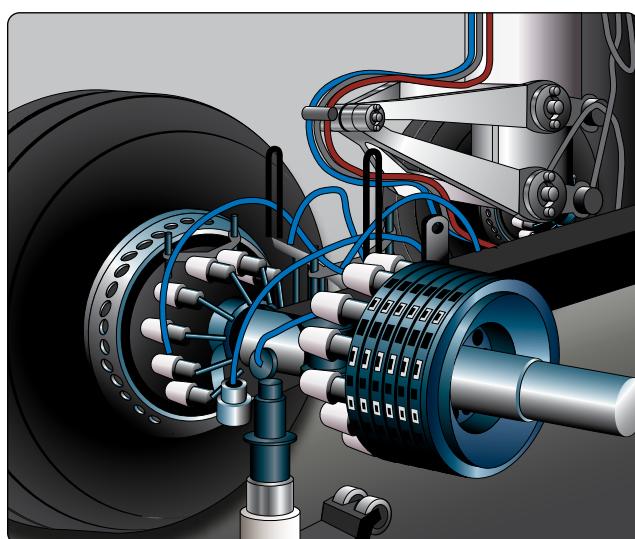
Many modern segmented rotor disc brakes use a housing machined to fit numerous individual actuating pistons.
